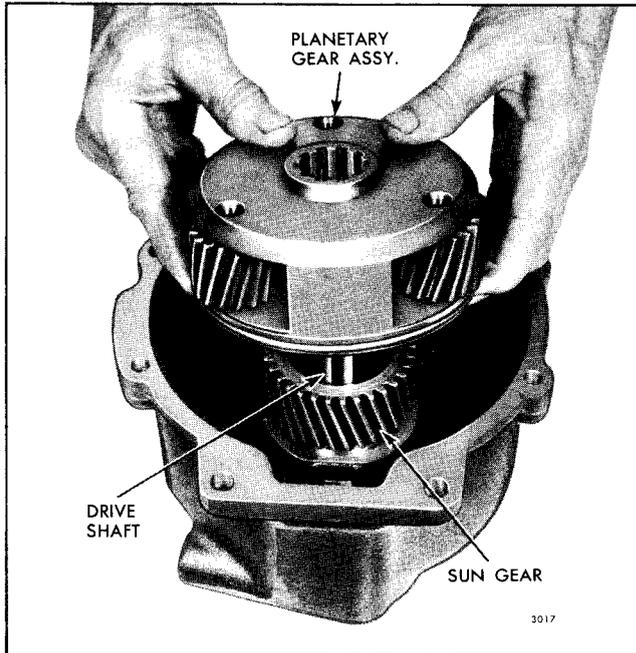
Removing or Installing Planetary Gear Assembly from/on Reduction Gear Drive Shaft (1.5:1 Ratio)
